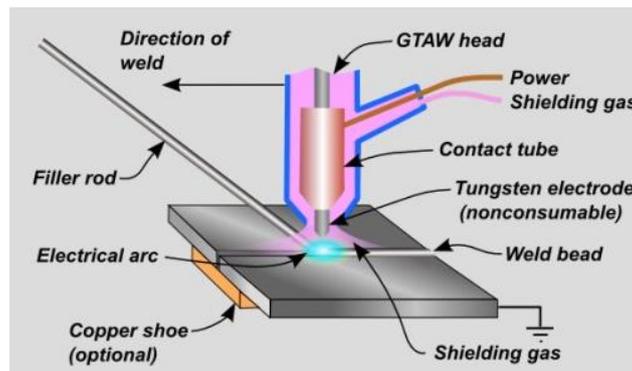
Welding Process Tungsten Inert Gas.
